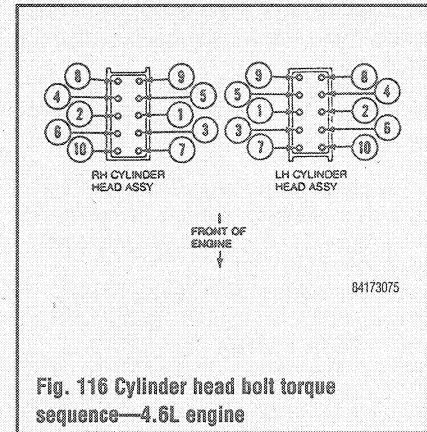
Cylinder head bolt torque sequence—4.6L engine
